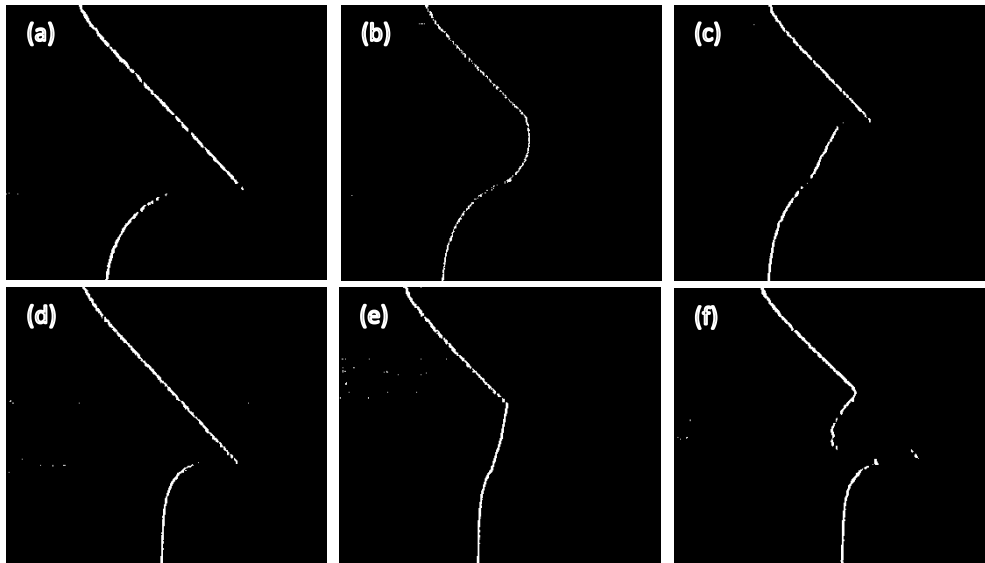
2D OCT images of (a), (d): the flanged joints (roof geometry), (b), (e): produced during laser brazing seams and (c), (f): faulty brazed seams showing no bonding to one of the sheet.
